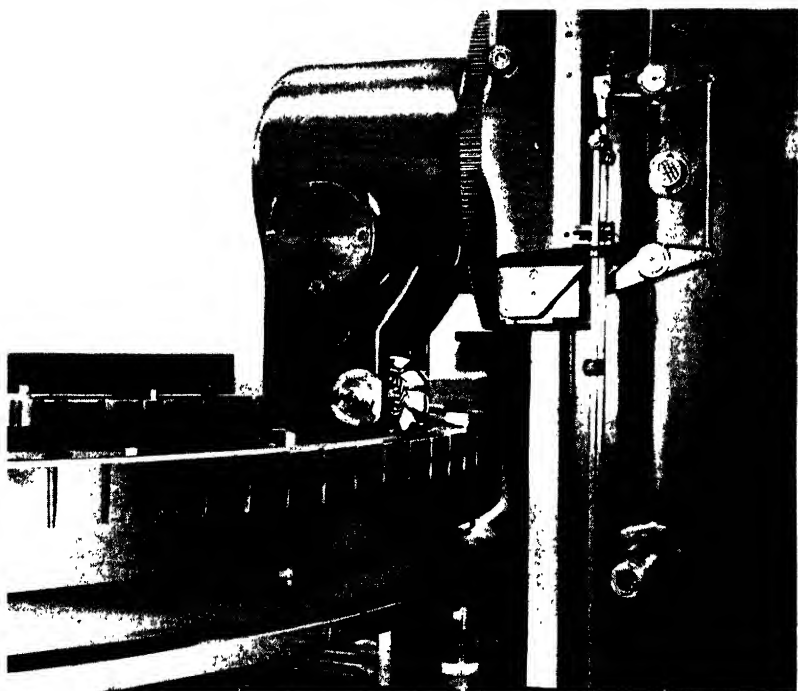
Special Cutter-head for Cutting the Teeth of Internal Gears up to 92 inches Pitch Diameter
